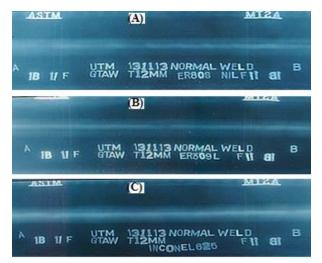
Radiography results of welds of (A) 80S-Ni1 (B) 309L (C) Inconel 625
